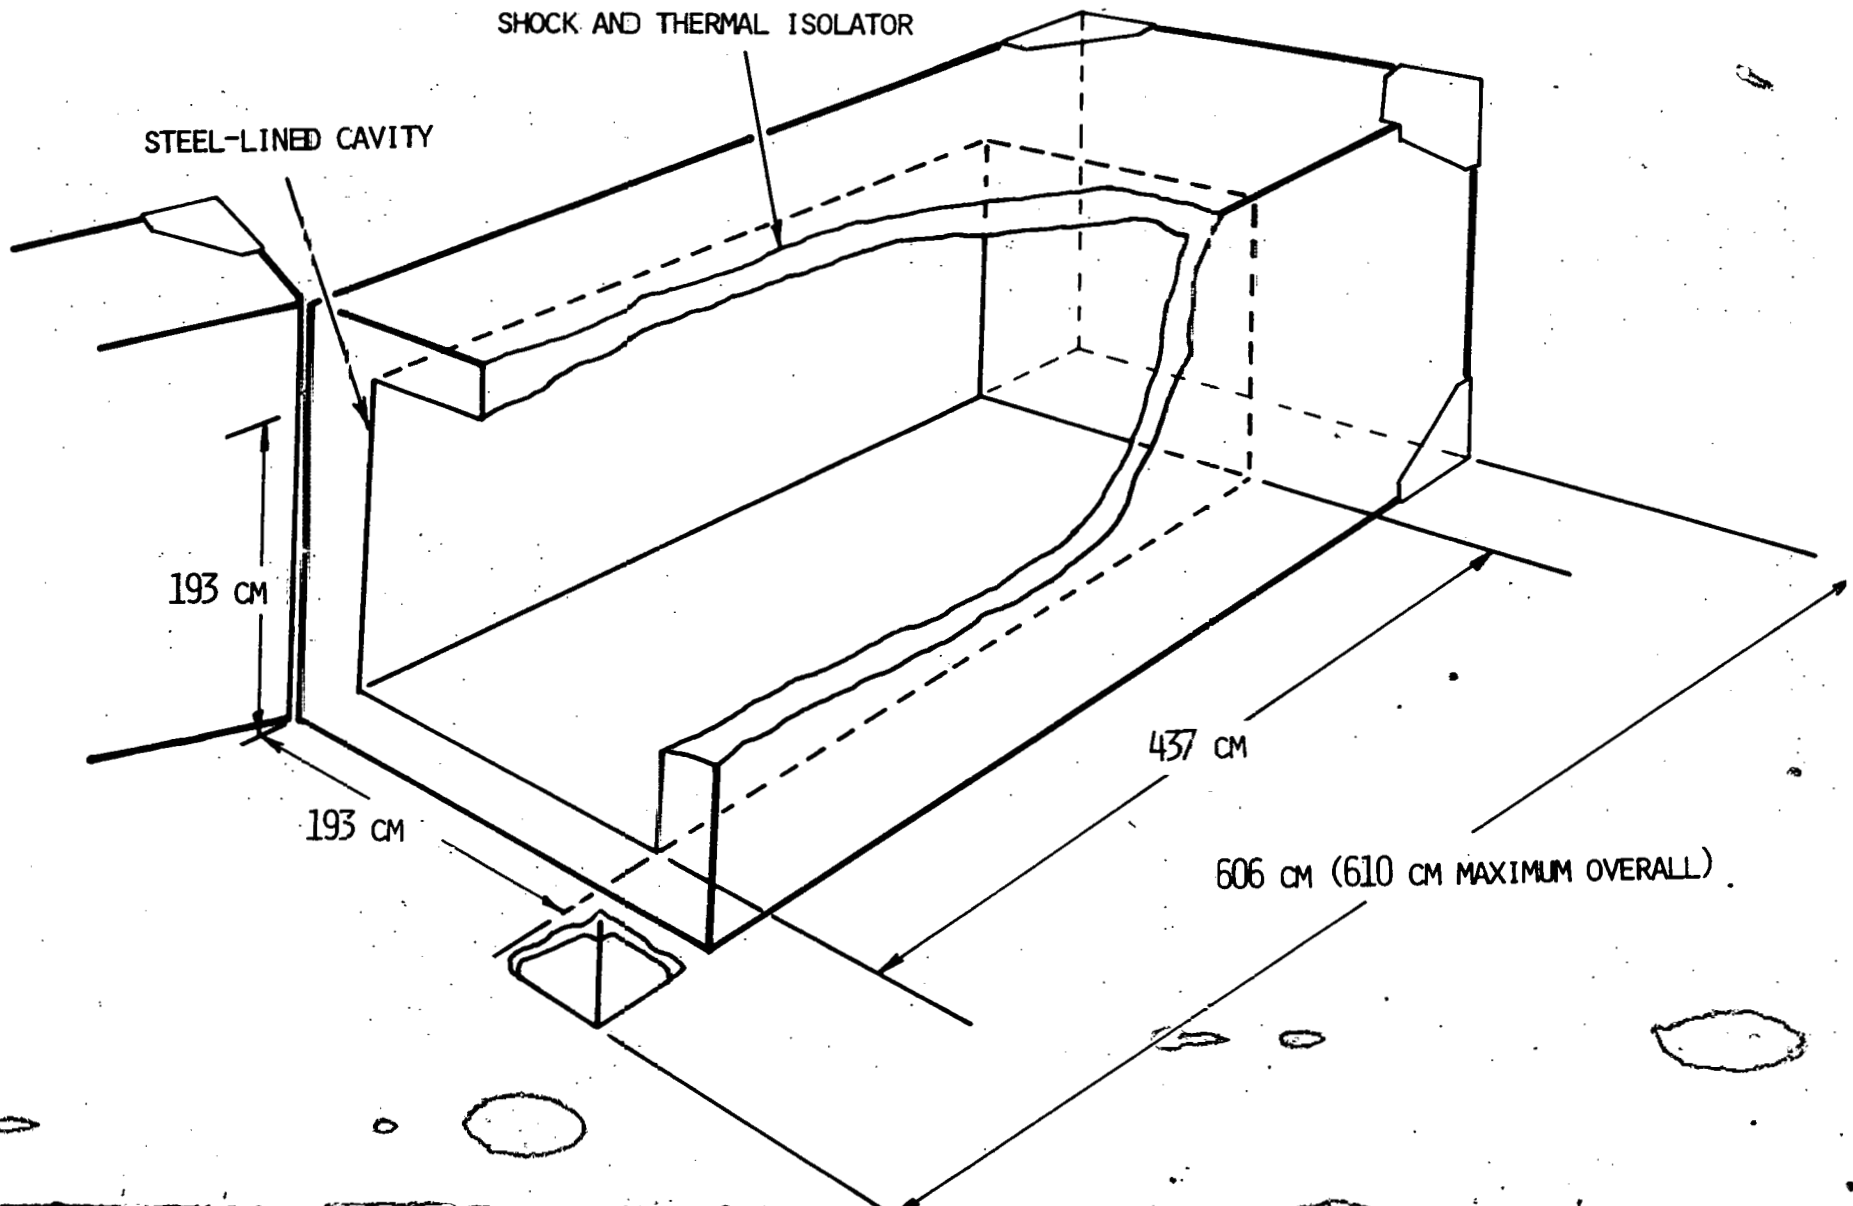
"SUPER TIGER" DRUM CARRIER
